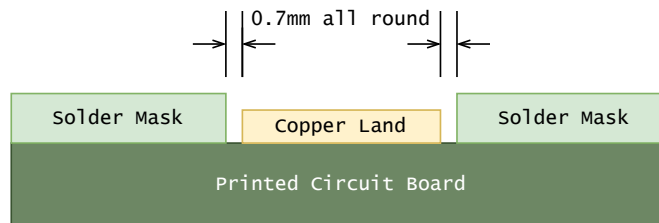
Preferred solder mask opening, side view, dimensions in [mm].
